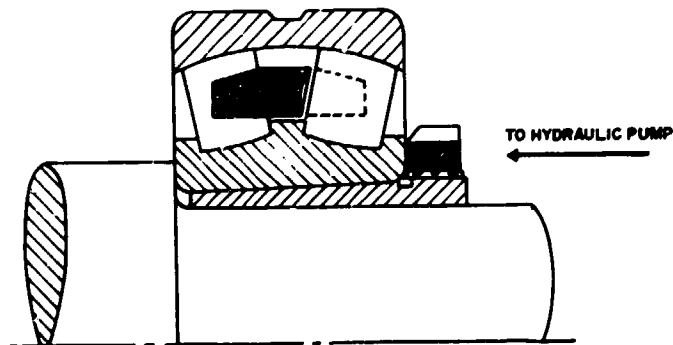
Hydraulic Removal For Withdrawal Sleeve
